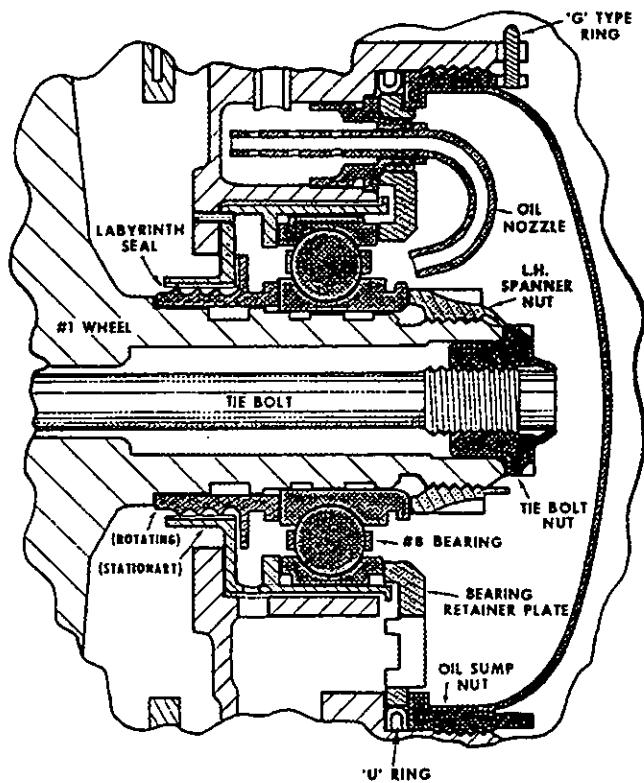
Sideview # 8 Bearing Housing (Allison, 1981)
